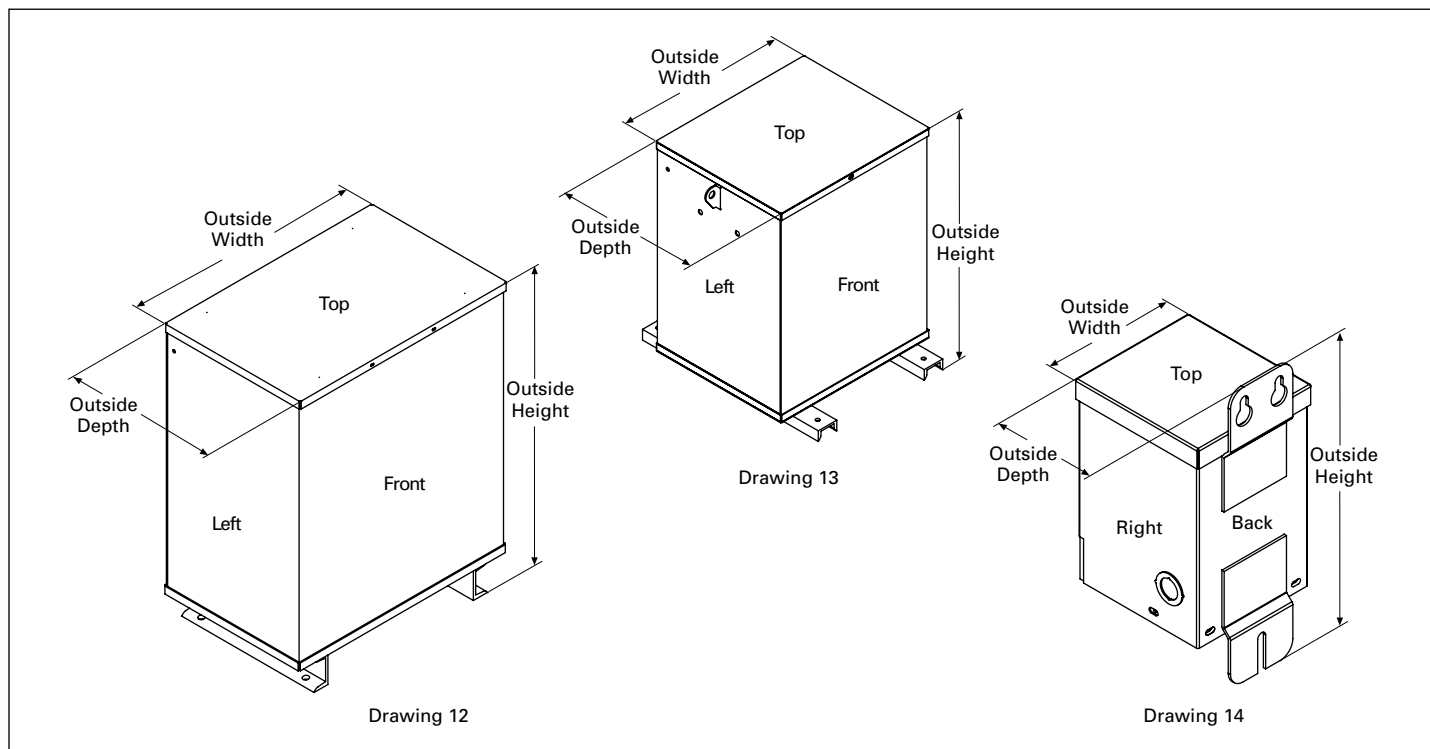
Enclosure Dimensional Drawings—Encapsulated Transformers
